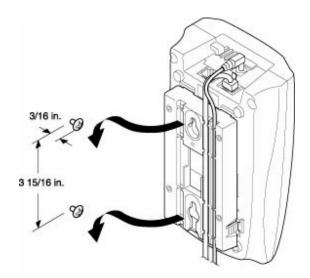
Attaching the Wall Mount Unit to the Wall
